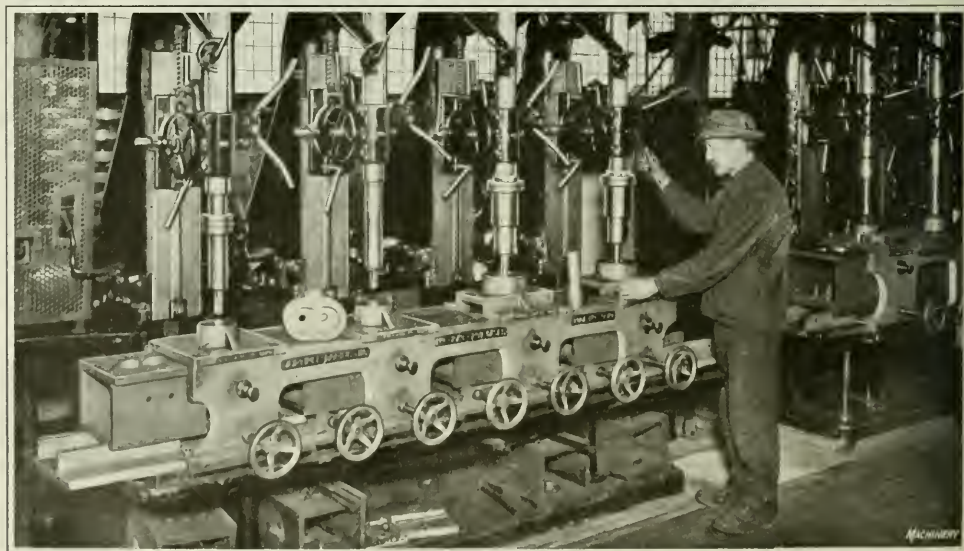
Four-spindle Gang Drilling Machine with Box Jig and Work-holding Shuttles which travel from Station to Station
